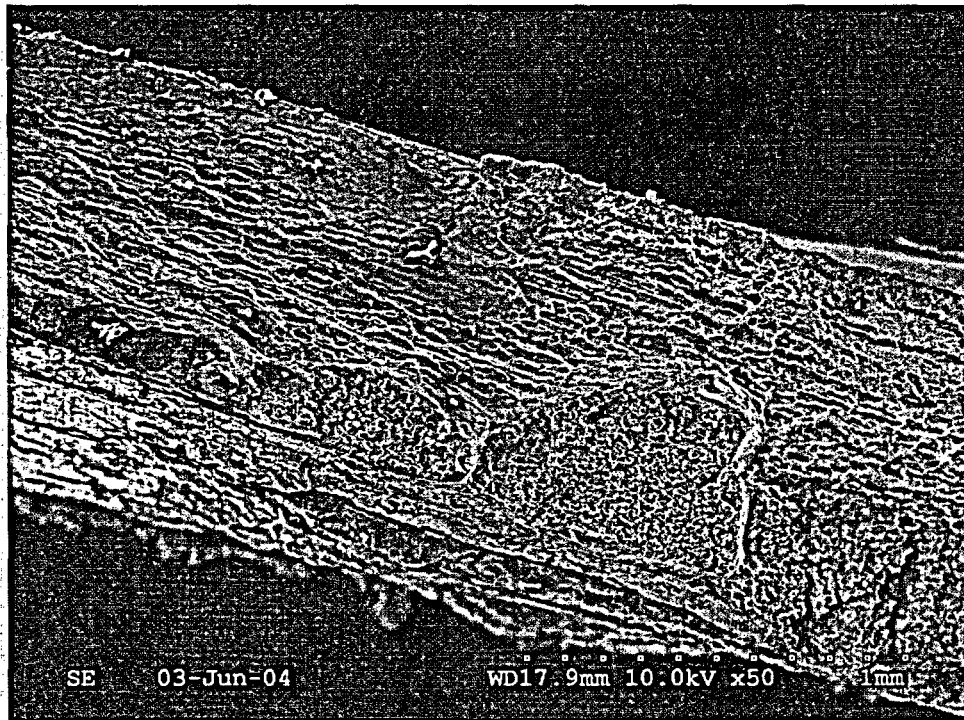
SE image of bottom edge of IGSCC on burst rupture surface of 2H TSP. 50X
